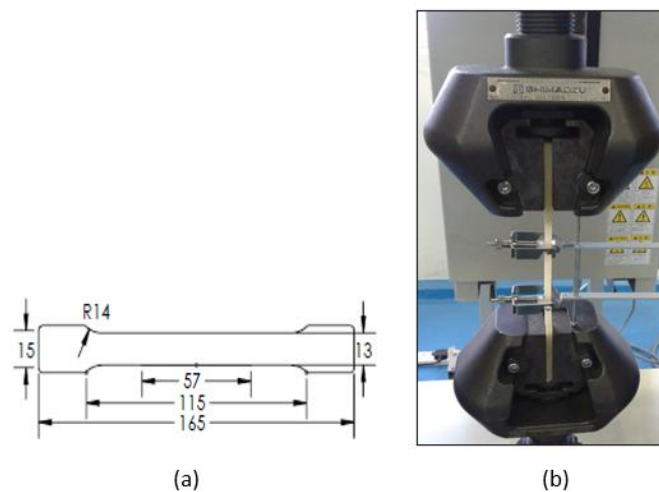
(a) Dimensions of tensile test specimen and (b) Clip-on extensometer
